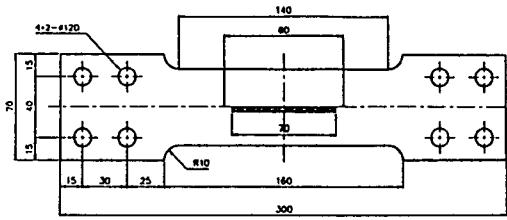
Pad-on-plate specimen(continuous welding)
